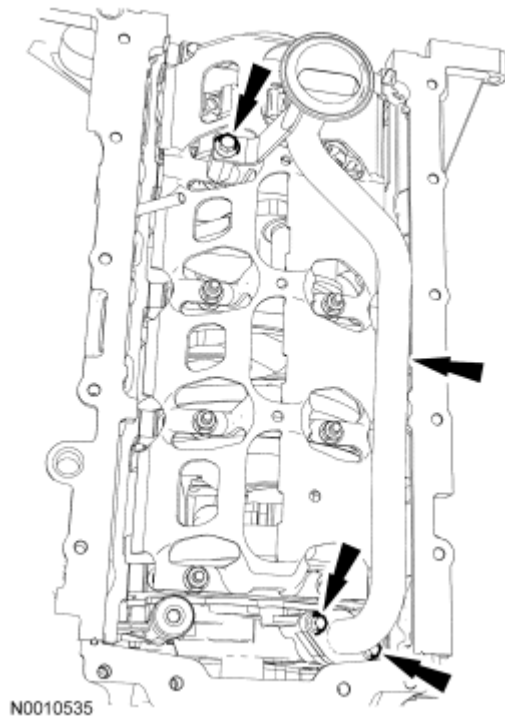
Locating Oil Pump Screen And Pickup Tube And Bolt
